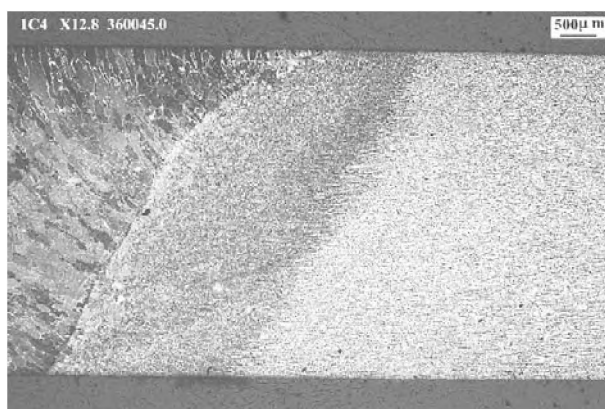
FCAW welded joint, coupon Ref. R1C4.
